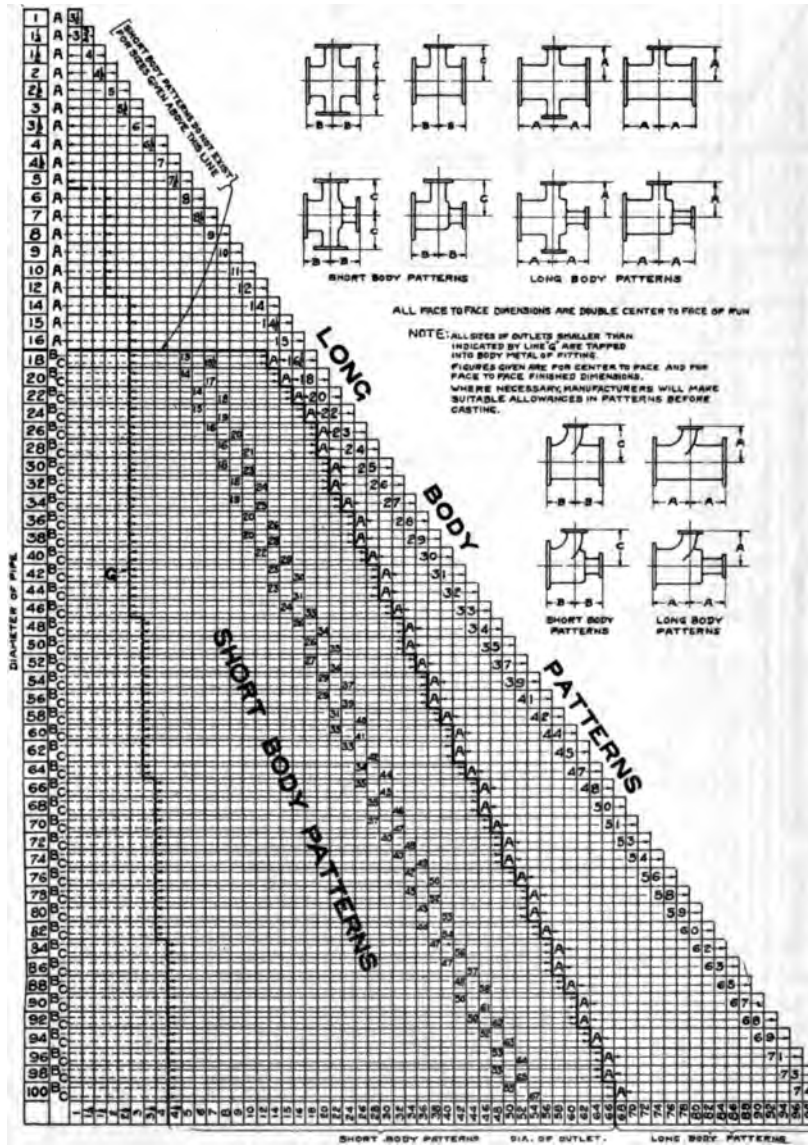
REDUCING TEES AND CROSSES, LONG AND SHORT BODY PATTERNS, 125-LB. WORKING PRESSURE PER Sq. IN.
